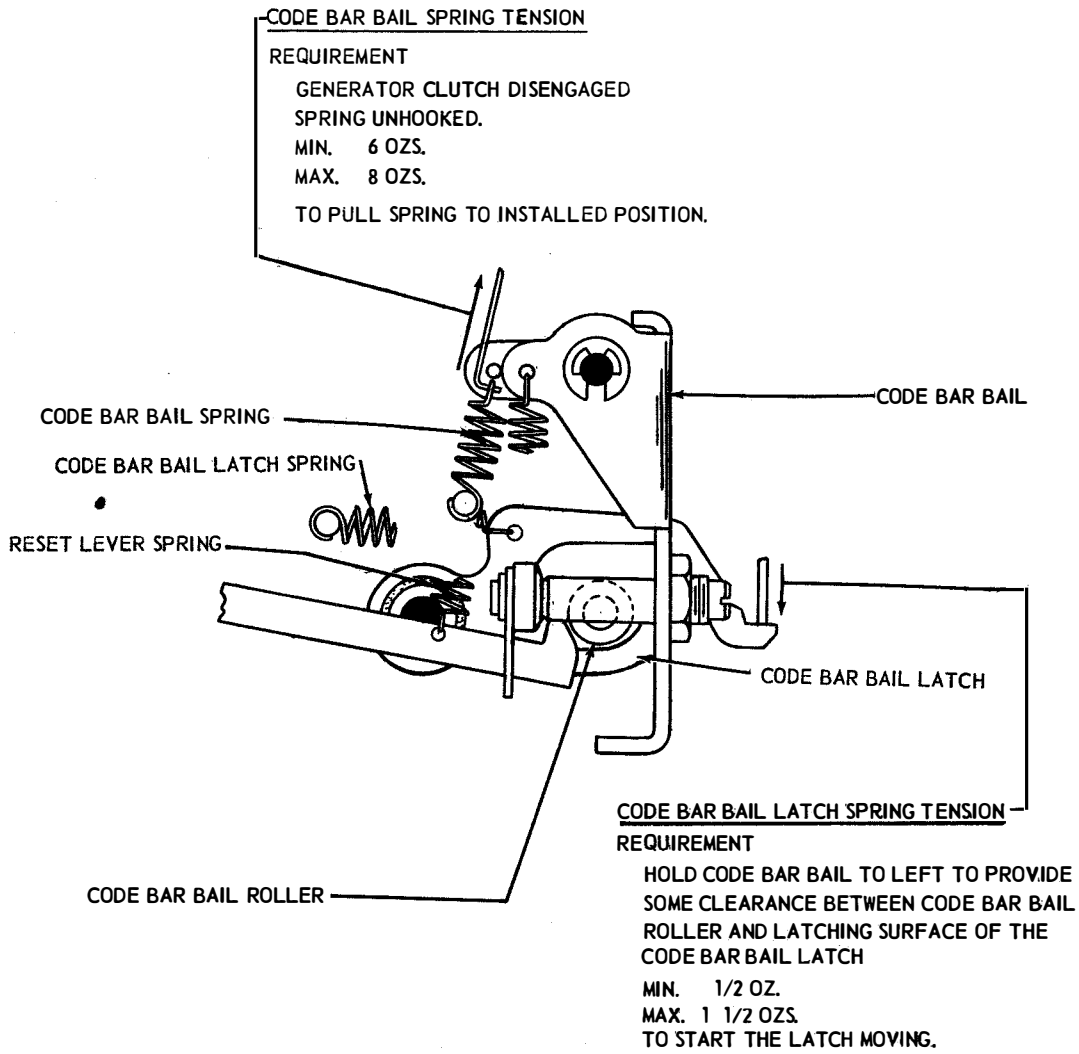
KEYBOARD, CODE BAR BAIL, FRONT VIEW
